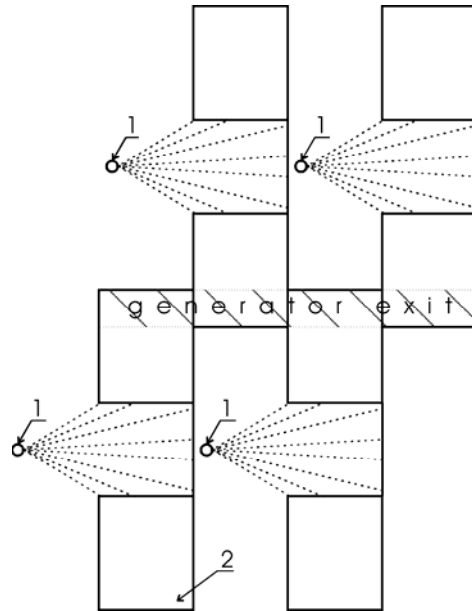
Multi-module CentSpraySOG; 1- spray nozzle, 2- separator body
